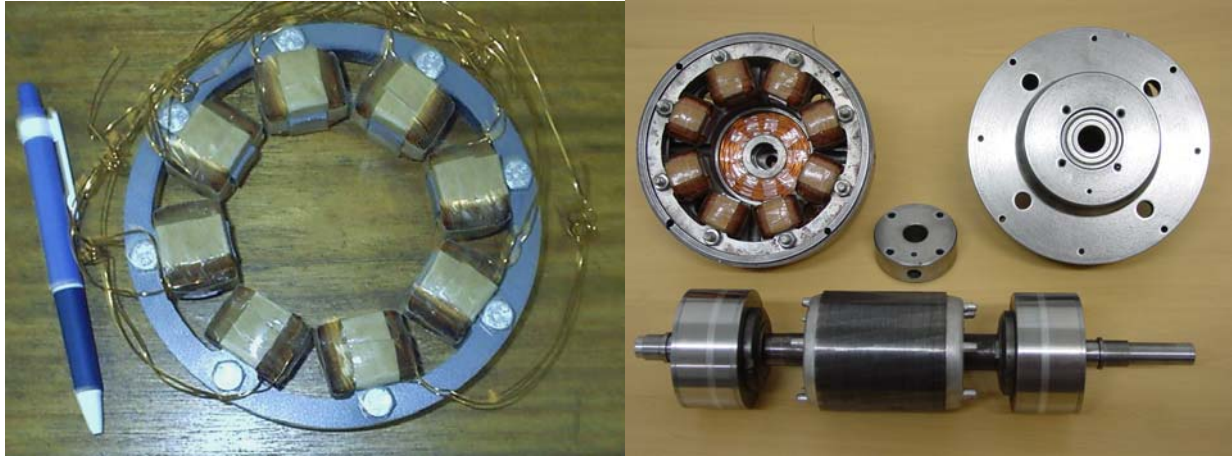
Magnetic bearing details. Left: one stator of radial AMB. Right: shaft with AMB rotors and caps.
